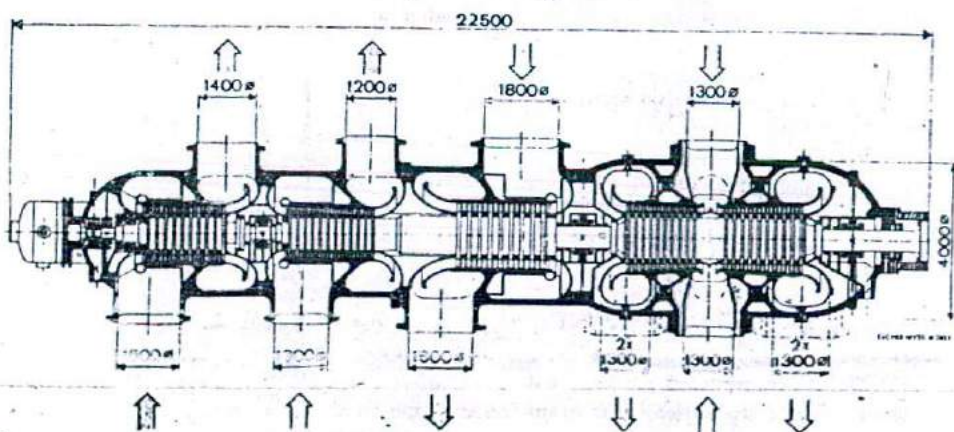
A proposed design for a helium-driver gas turbine, dimensions in millimeters [44].
